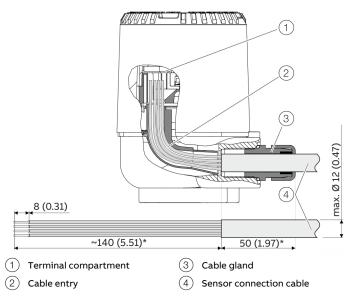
Connection to the transmitter, dimensions in mm (in.)
